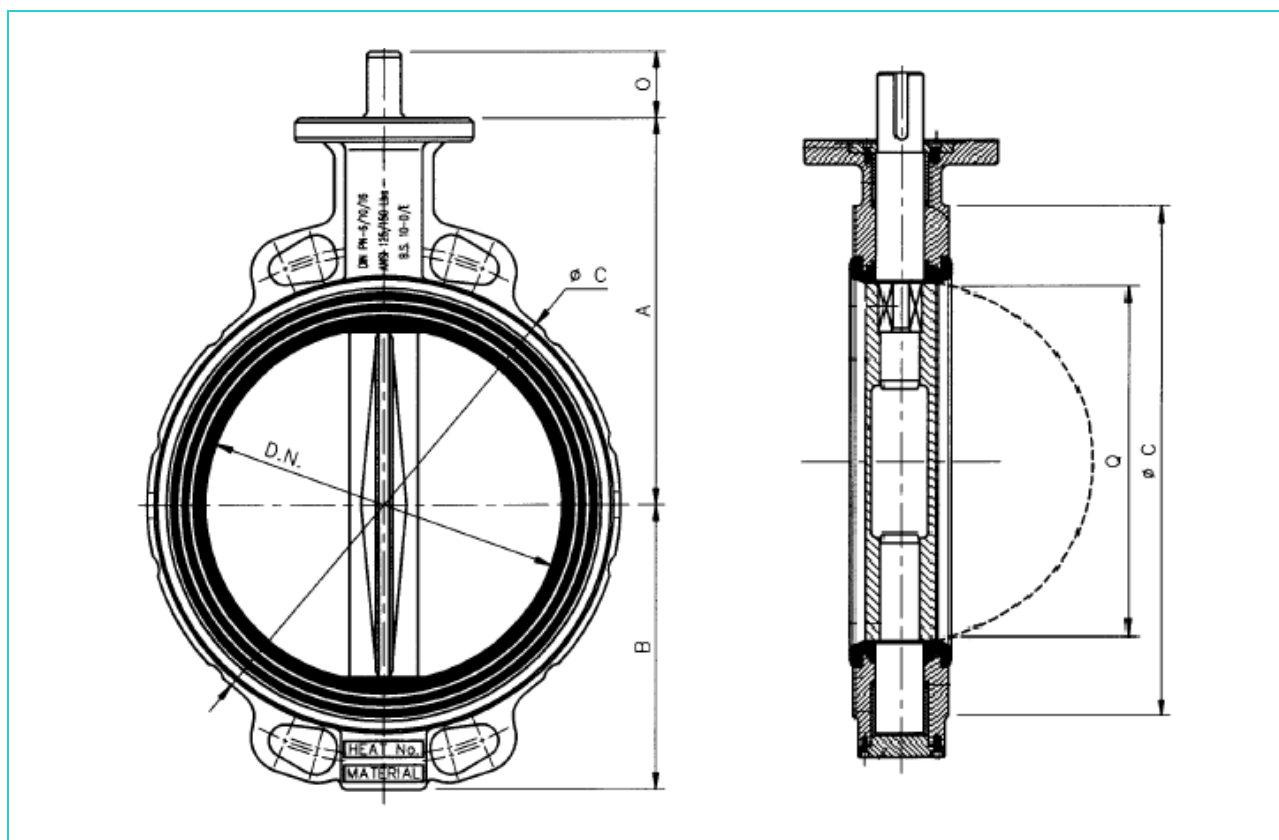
Butterfly Valve – API 609 – Wafer Type
